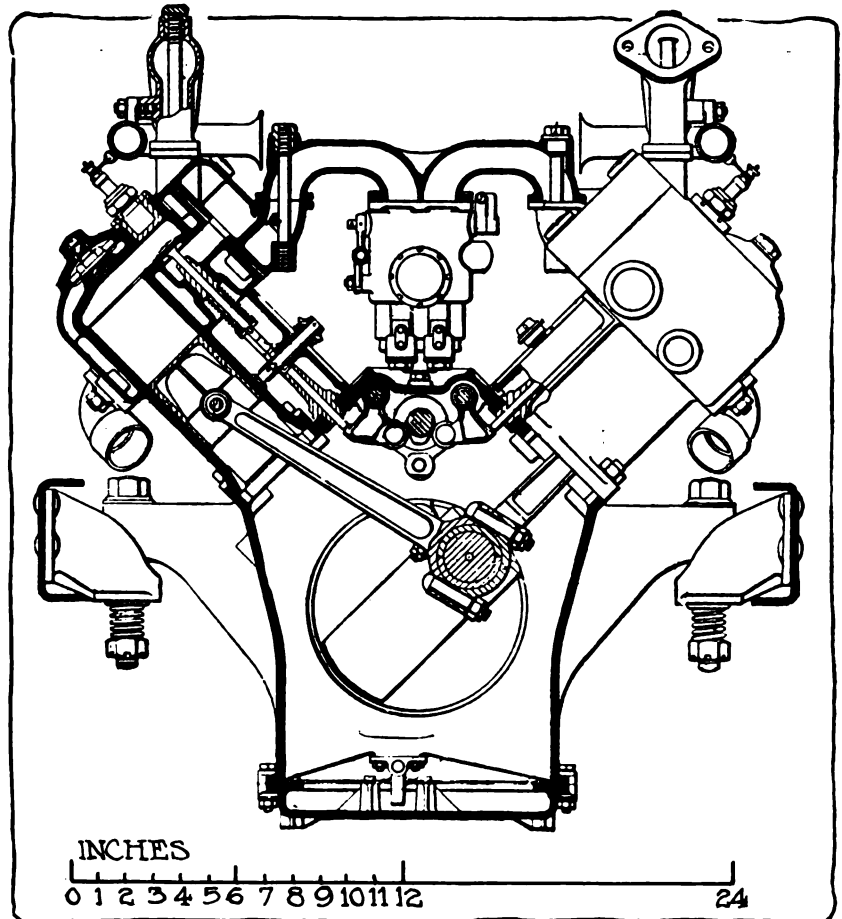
Part section through motor showing mounting of double carburetor, arrangement of valve mechanism and the connecting-rod construction. Note the springs used in anchoring the motor to the frame
